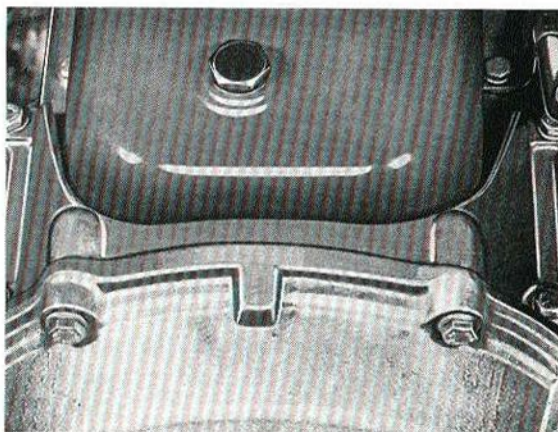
Reinforcing bracket, cylinder block—flywheel housing
